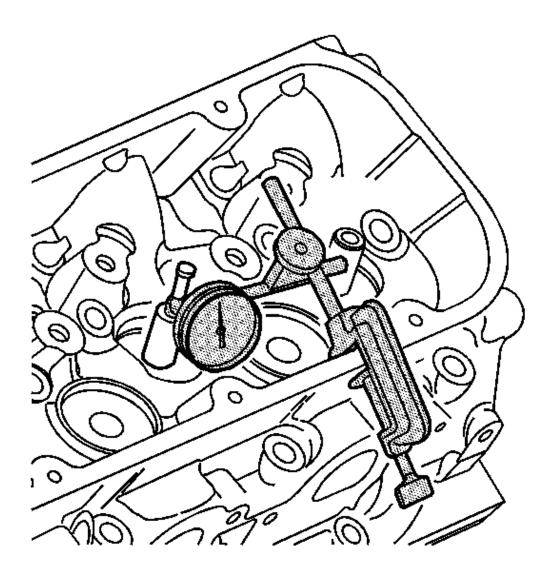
Measuring Valve Stem-To-Guide Clearance Courtesy of GENERAL MOTORS CORP.
